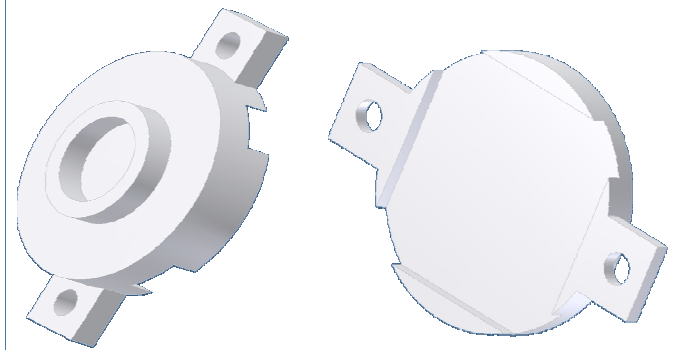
CAD Diagram of New Front Connecting Device Showing Isometric View and Back View
